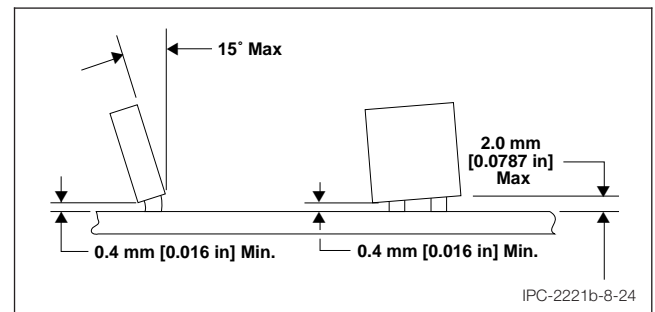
Radial Two-Lead Component Mounting, mm [in]
